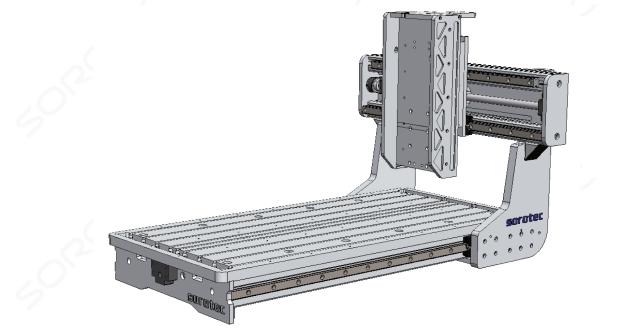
Completely assembled Z-axis on the mechanically fully assembled Compact-Line
